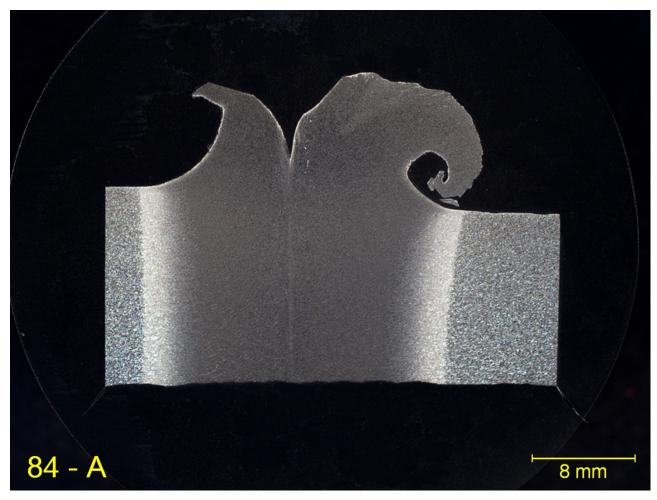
Cross Section of Upper Section of Rail Head for Weld 84
